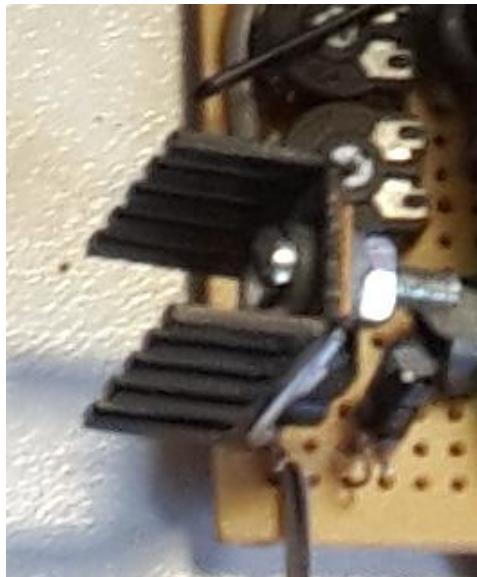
Prototype 3 Testing 5 V regulator with heat sink
